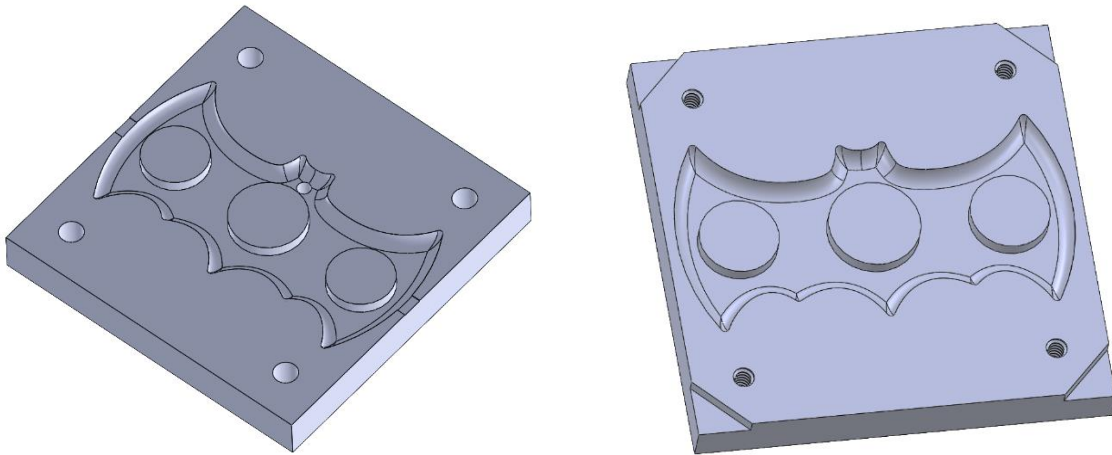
3D SolidWorks models of fidget spinner molds to be used for injection molding.
